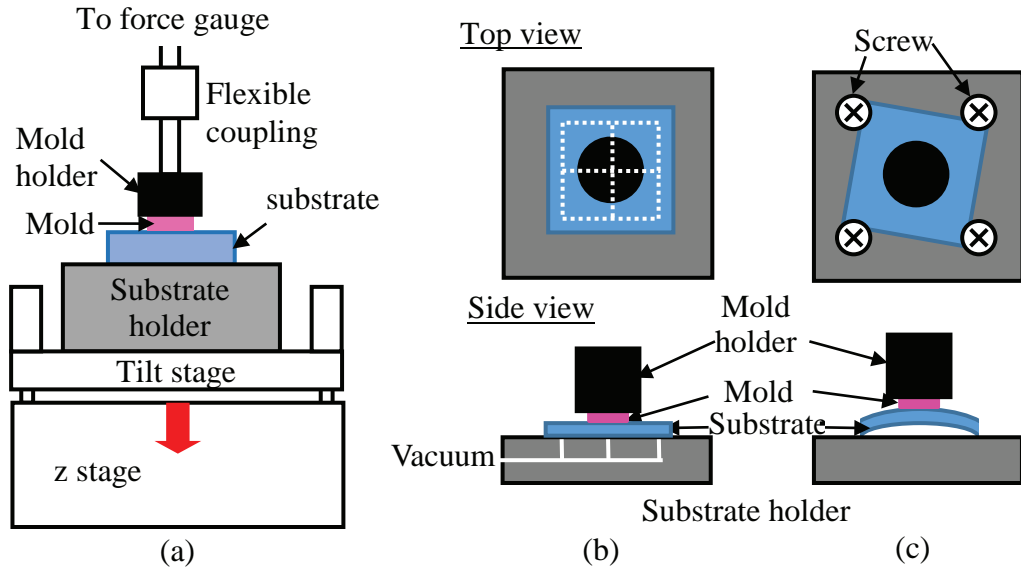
Demolding tool. (a) Over view, (b) vacuum chucking and (c) screw chucking
